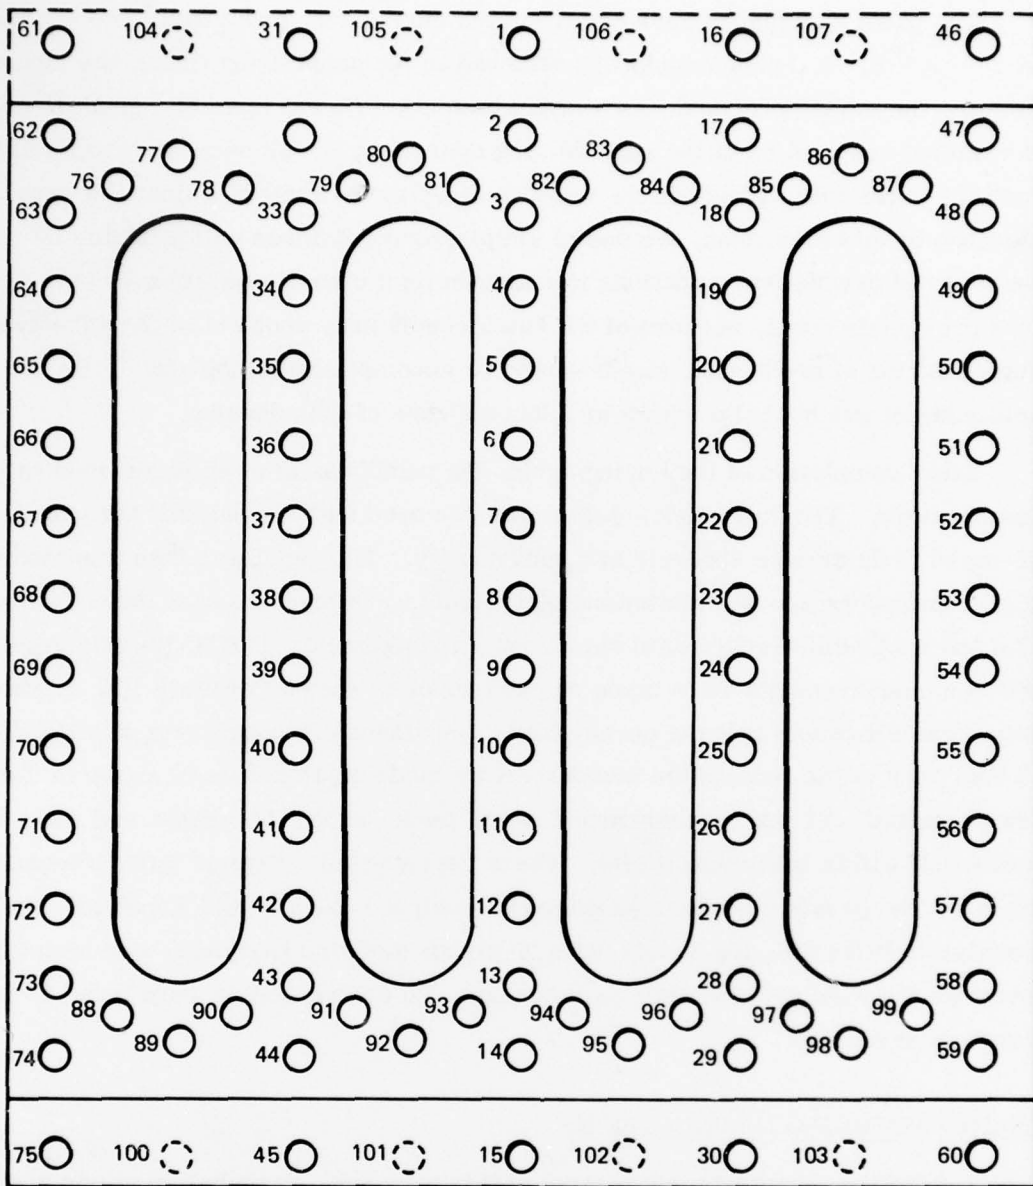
PANEL WELD SEQUENCE\
